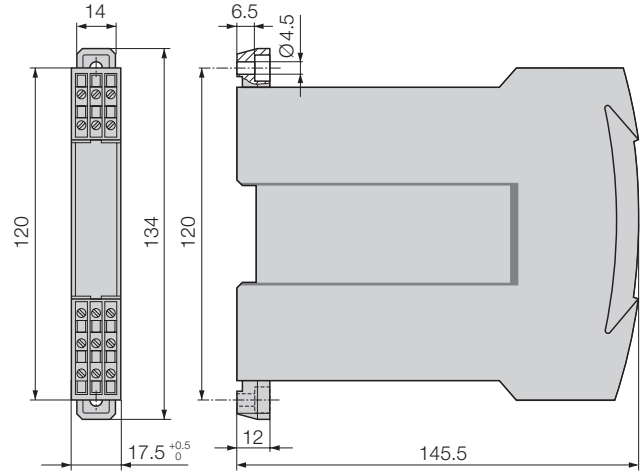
SINEAX TV 808 in housing S17, screw hole mounting brackets pulled out.
